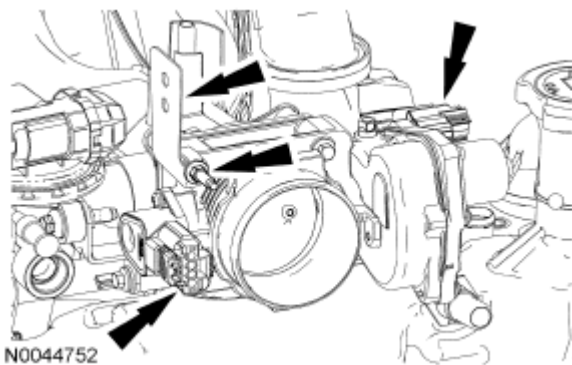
Identifying Electronic Throttle Body (TB), Throttle Position (TP) Sensor Electrical
